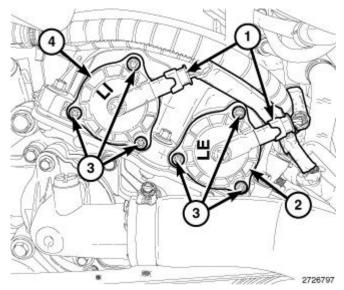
Variable Valve Timing Solenoids, Connectors & Bolts
